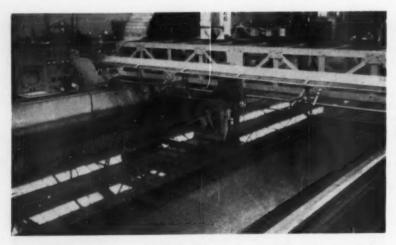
Ultrasonic inspection of the finished plate, using the Curtiss-Wright Immerscope.
